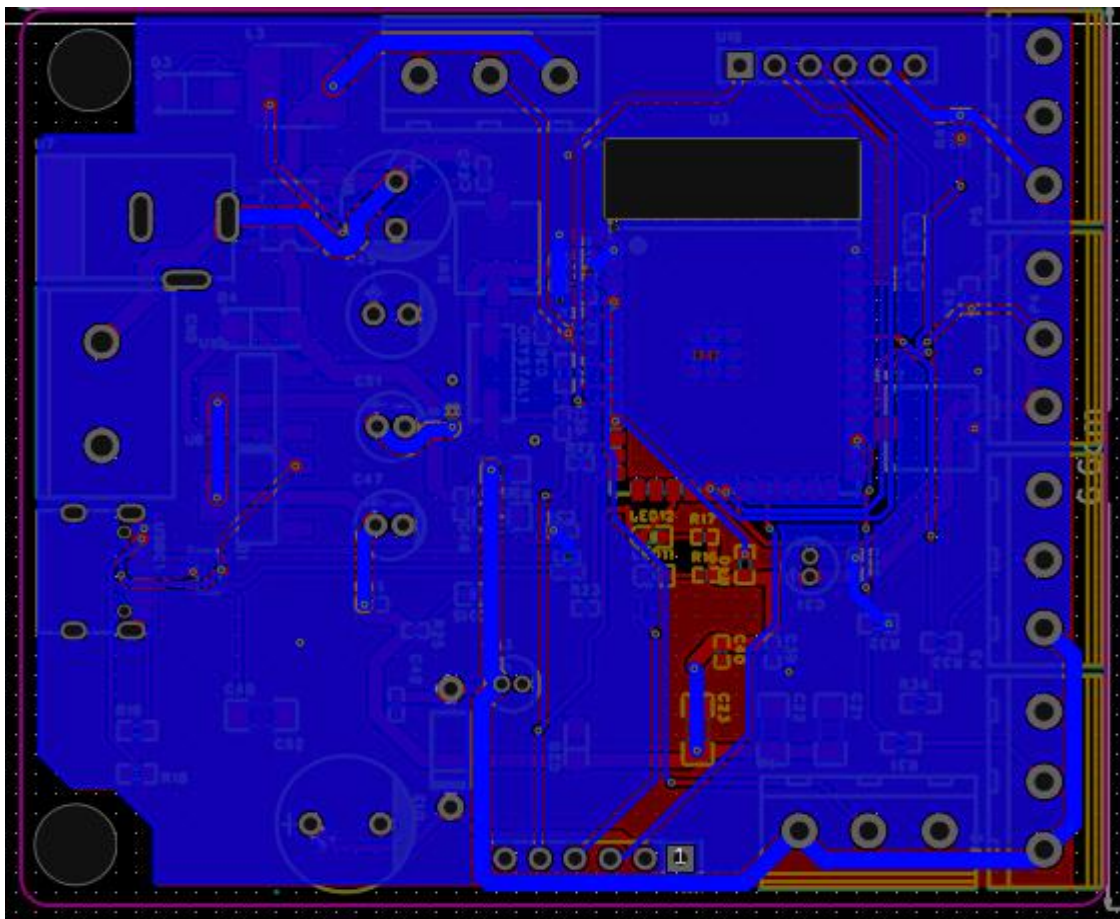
Bottom Layer View of the PCB Layout in EasyEDA.
